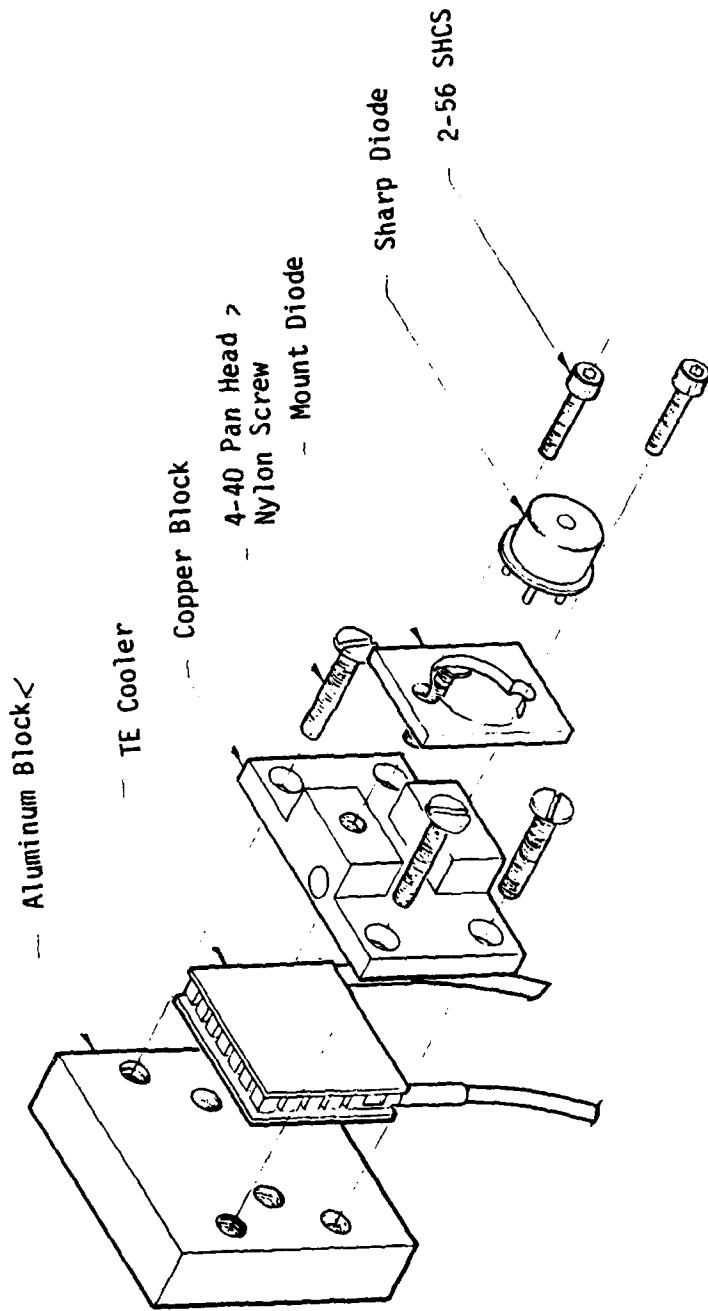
Exploded view of laser diode assembly designed by Liconix.
